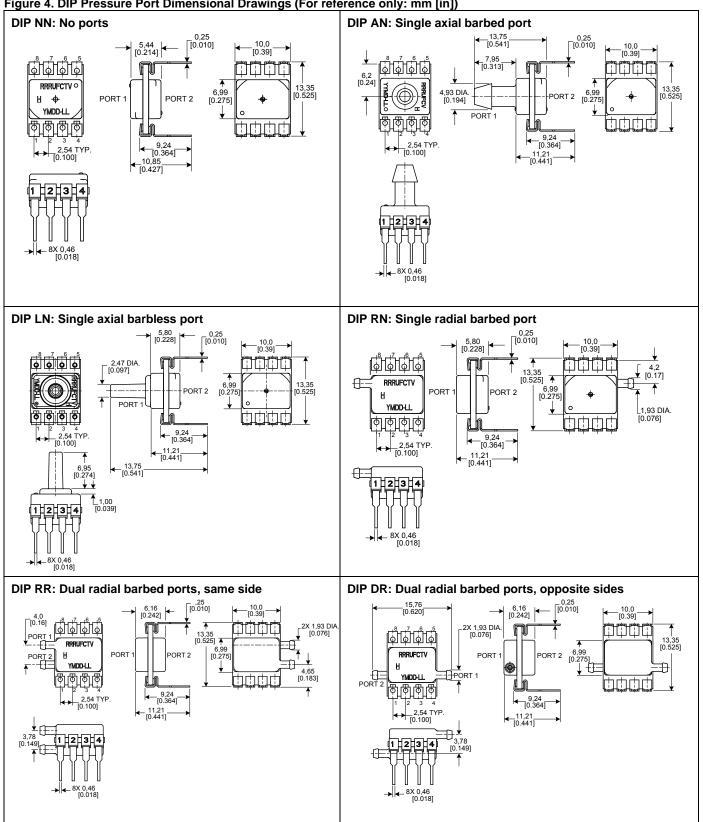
DIP Pressure Port Dimensional Drawings (For reference only: mm [in])
